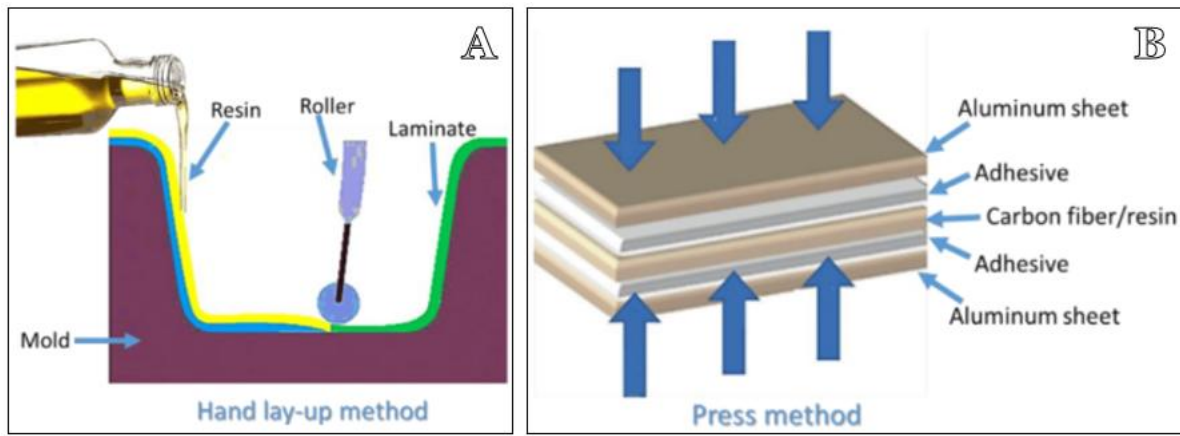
Carbon fiber (a) hand lay-up and (b) press method manufacturing processes [5]
